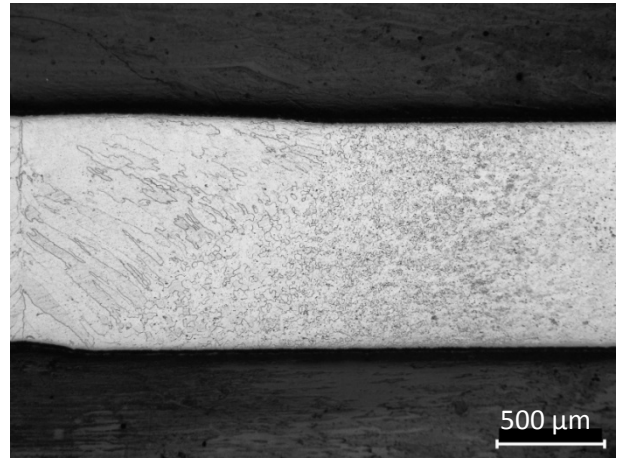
Macrograph of C-C 1.0 mm thick similar joint showing the welded zones
